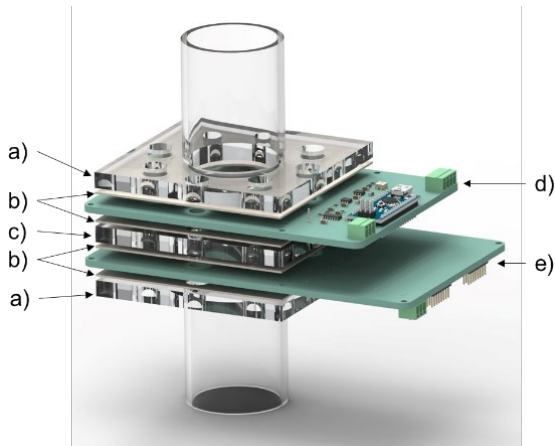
Illustration of developed sensor attached to a pipe: a) Pipe with flange, b) Paper gasket, c) Spacer plate (8mm), d) Excitation PCB: generates symmetrical square wave signal, e) Measuring PCB: 16 measuring electrodes.
